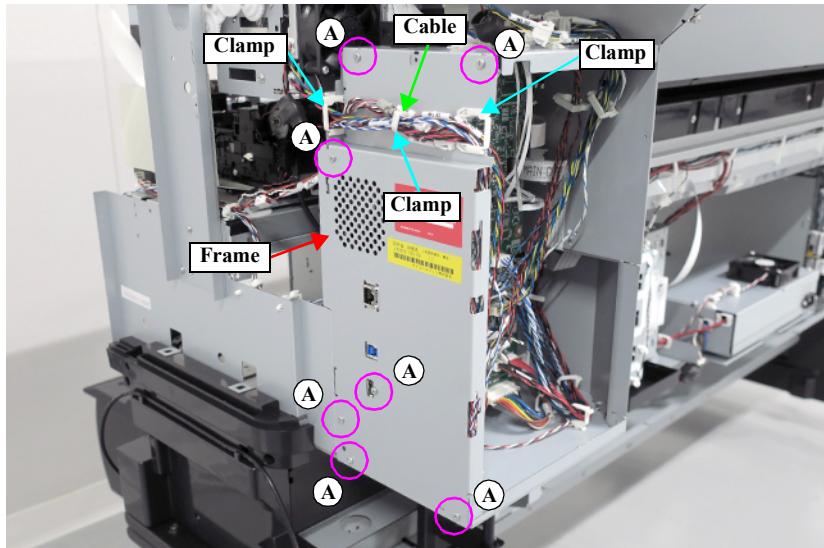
Removing the MAIN BOARD COOLING FAN (1)
